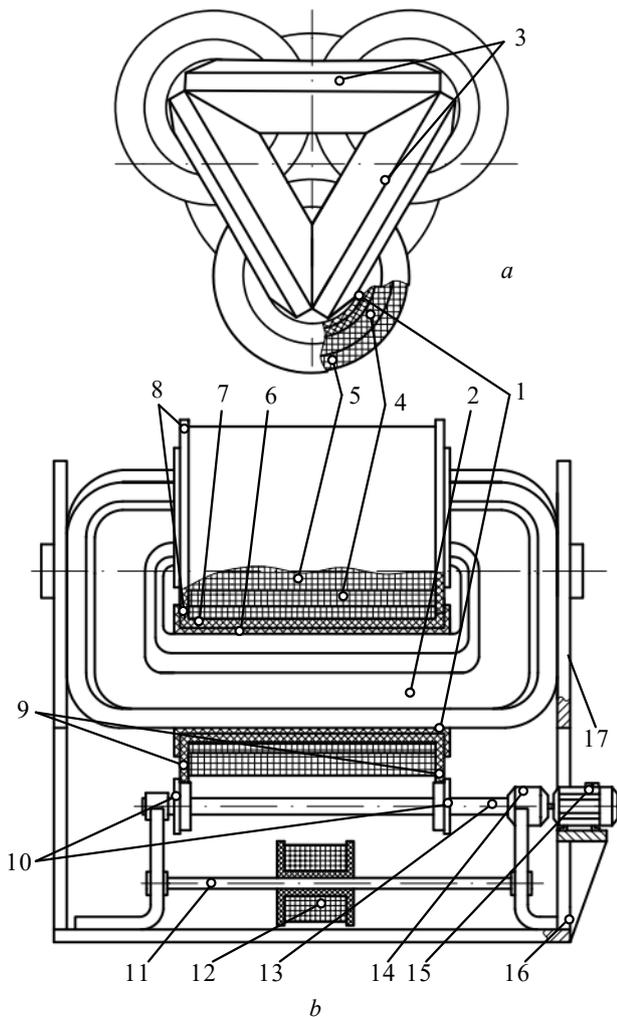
Top view of the active part (a) and the schematic diagram of the winding equipment on the rotating components of the insulating frames (b): transformer with twisted one-piece magnetic core: 1 – frame; 2 – rod; 3 – magnetic core; 4, 5 – winding turns of low and high voltages; 6, 7 – fixed and movable insulation layers; 8 – annular insulating element; 9 – kinematic pair; 10 – torque transmitter; 11 – axis; 12 – winding turns coil workpiece; 13 – shaft; 14 – reducer; 15 – drive motor; 16 – base; 17 – support
